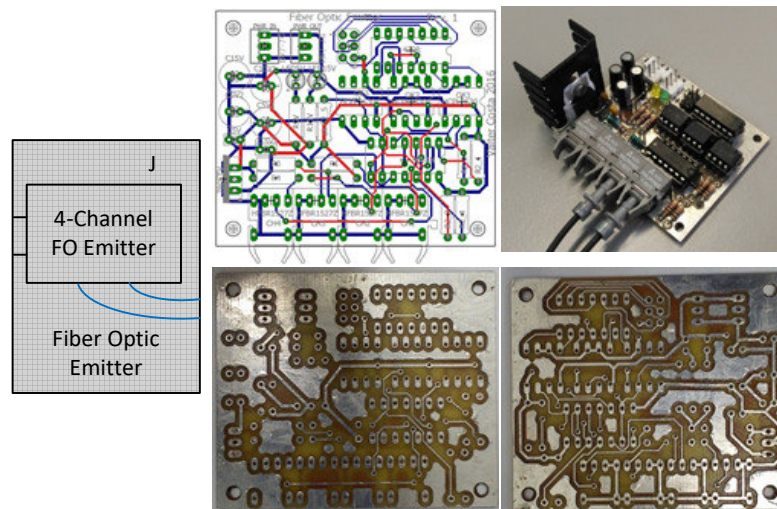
Fiber Optic Emitter PCB prototype (62x52 mm), Board design; PCB Top and Bottom Layer and PCB full assembly
